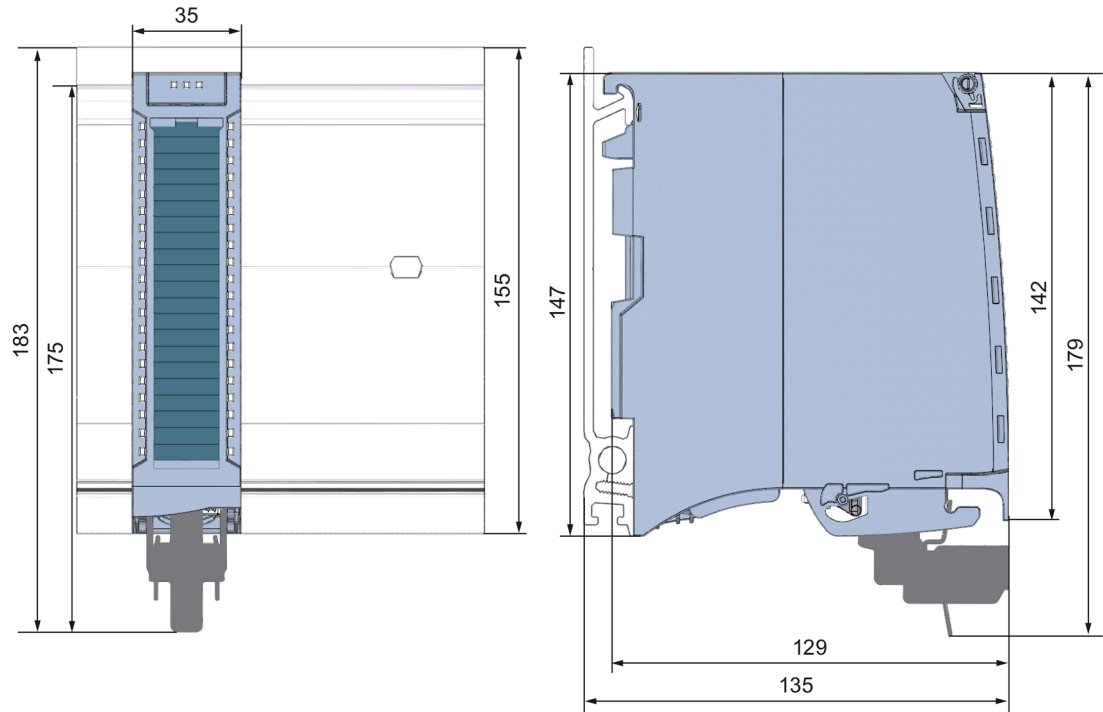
Dimensional drawing of the TM PosInput 2 technology module
